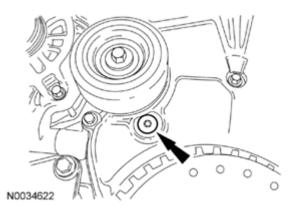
Locating Lower Front Cover Timing Hole Plug Courtesy of FORD MOTOR CO.
